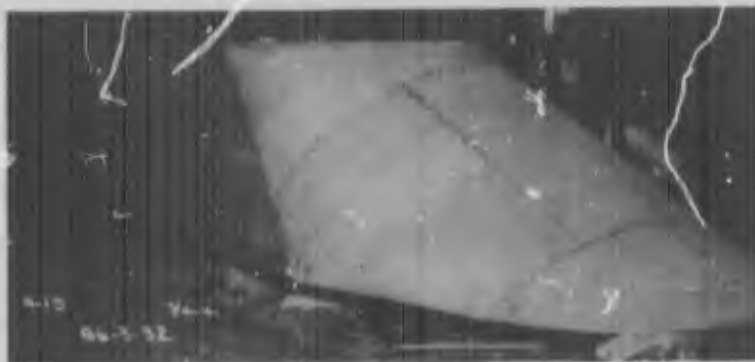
GENERAL VIEW OF BOW. The bow section of a plywood ponton being constructed in the Engineer Board shops. Note that all joints are of riveted construction.
